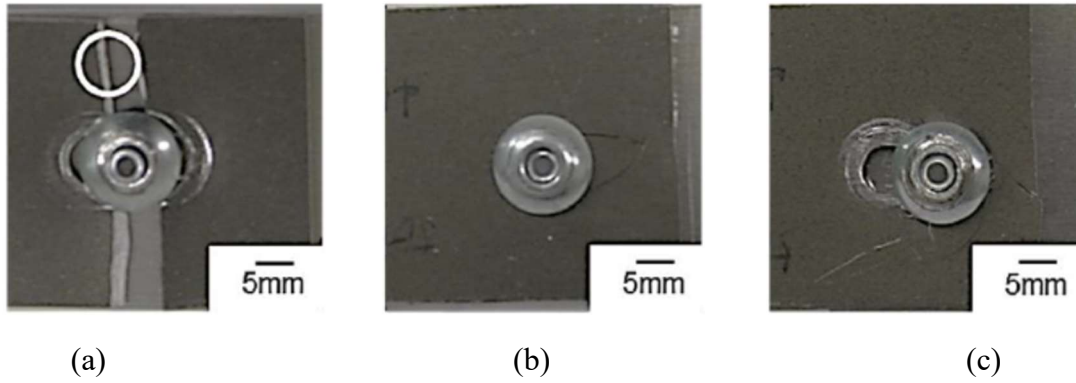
Different failure modes in as-fabricated FSBR Mg/Al joints: (a) tension, (b) shearing, and (c) bearing followed by cleavage.
